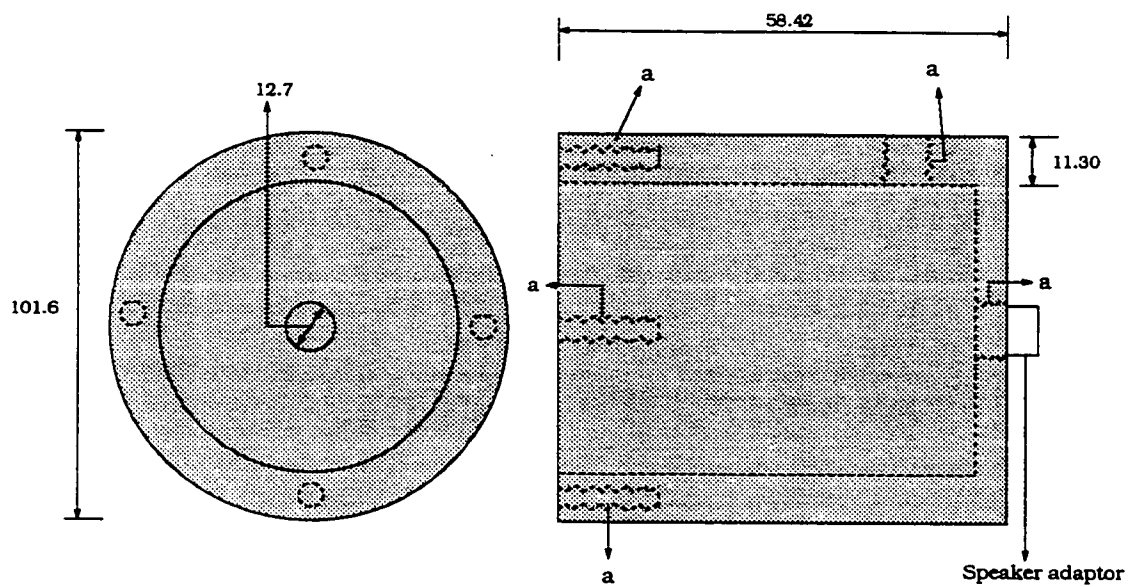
Speaker casing made of aluminium shown in two different views with the threads drilled at positions shown by 'a' with dimensions in mm.
